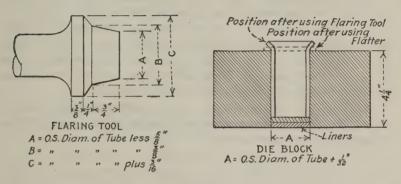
Details of Flaring Tool and Die Block Required for Making Flange Tests of Boiler Tubes
